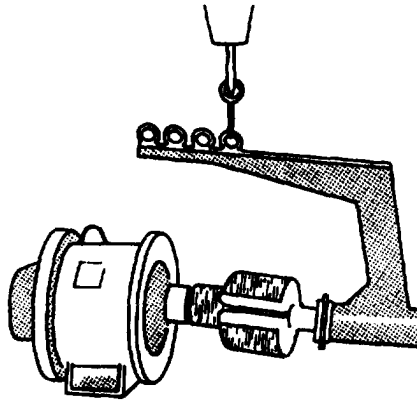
Rotor Assembly Lifting Device (Typical)
